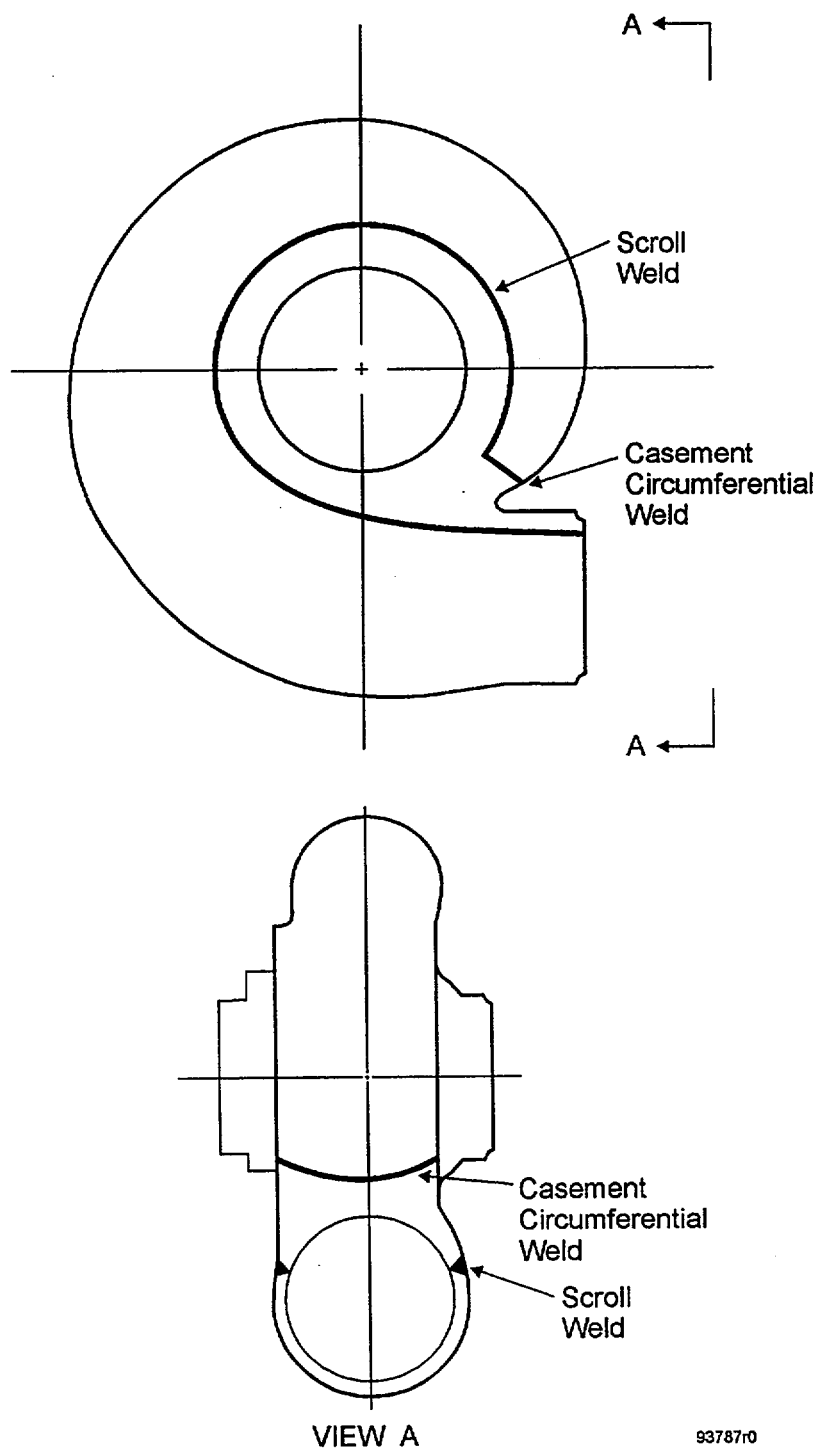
Schematic Drawing Showing Davis-Besse Reactor Coolant Pump Casing Welds
